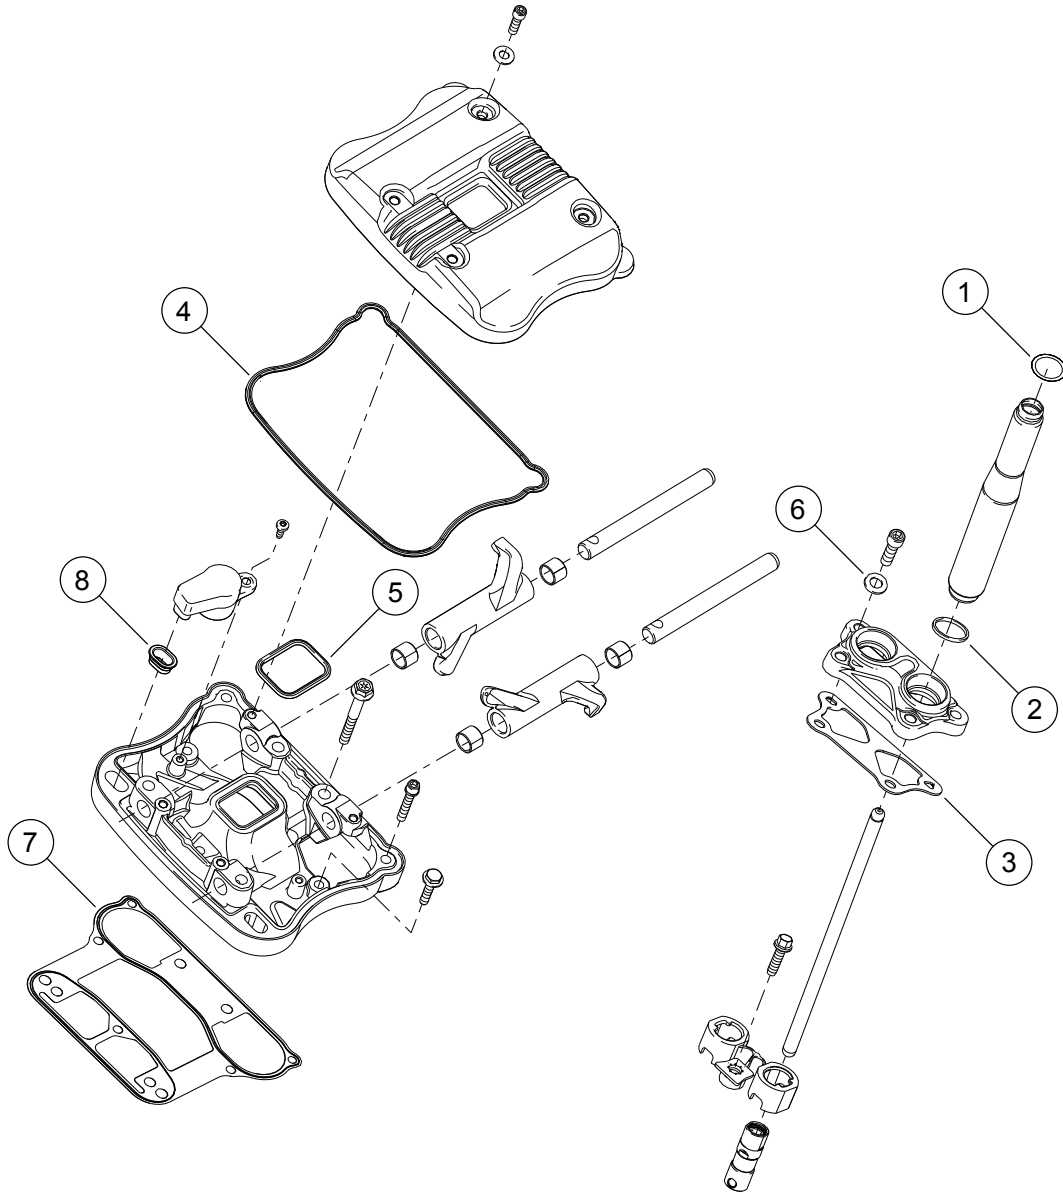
Service Parts: Screamin' Eagle XL 833 to 1200 Conversion Kit
